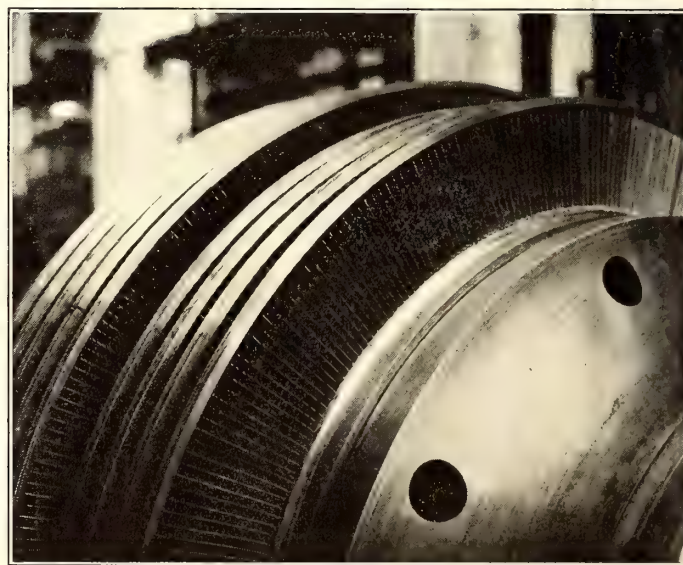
VIEW OF TURBINE BLADES, SHOWING SHROUDING
